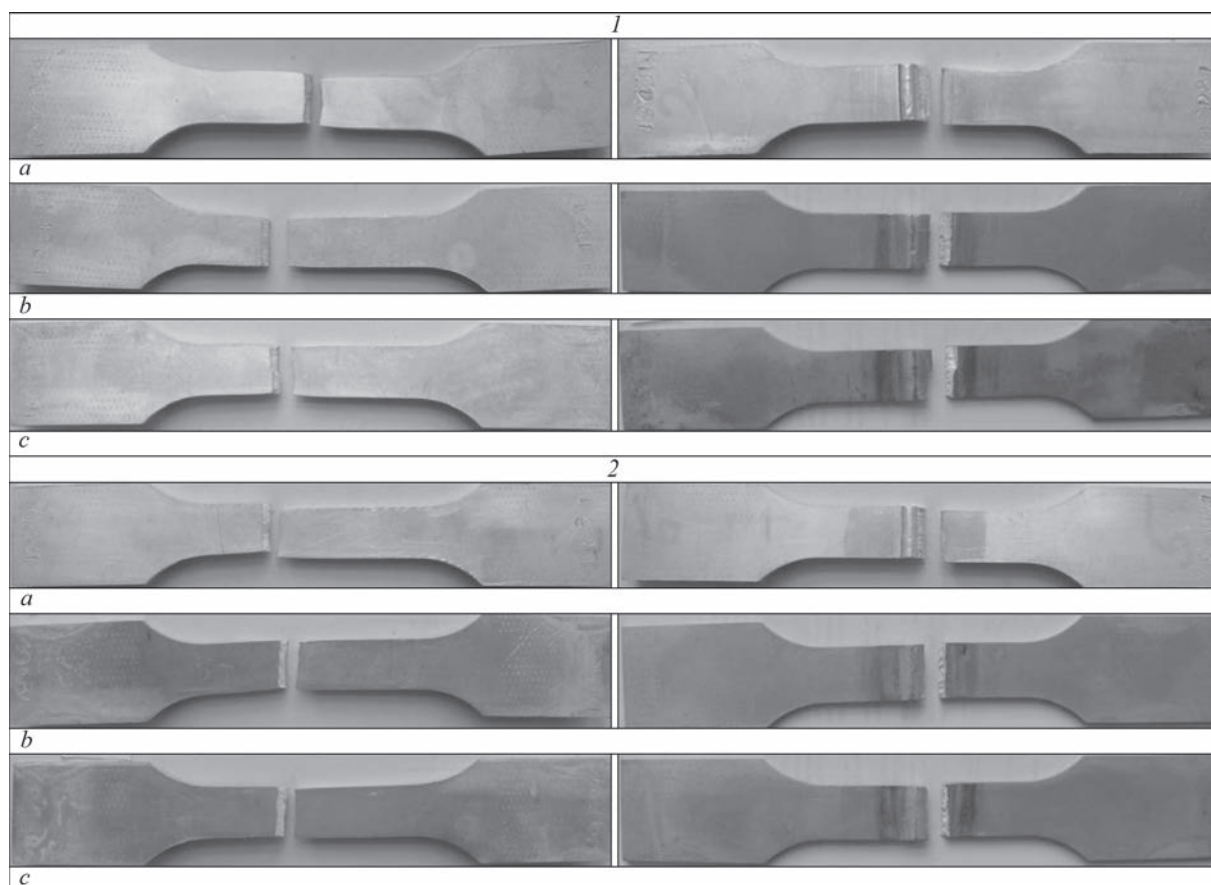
Appearance of base metal and welded joint of 2219 alloy specimens in the T81 condition along (1) and across (2) the rolled metal before corrosion tests (*a*), after corrosion tests in amyl (*b*) and its vapors (*c*)
